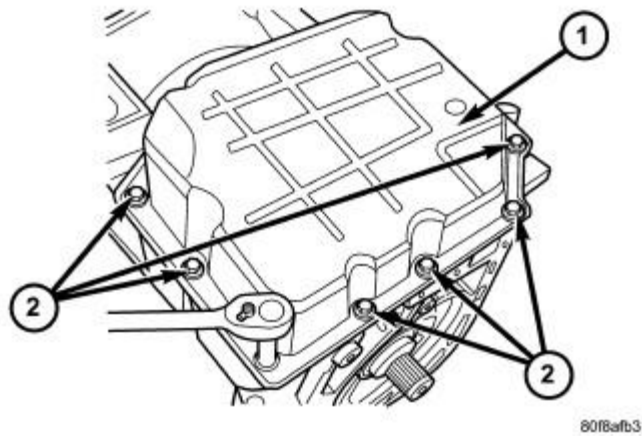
Remove/Install Transmission Oil Pan Bolts
